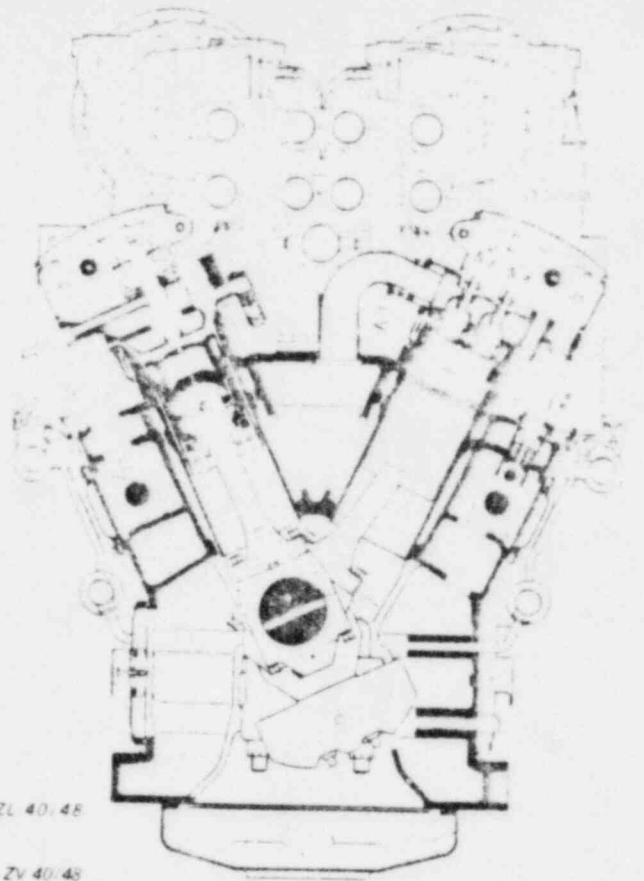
(Right) Cross-section of ZV 40/48 engine.
